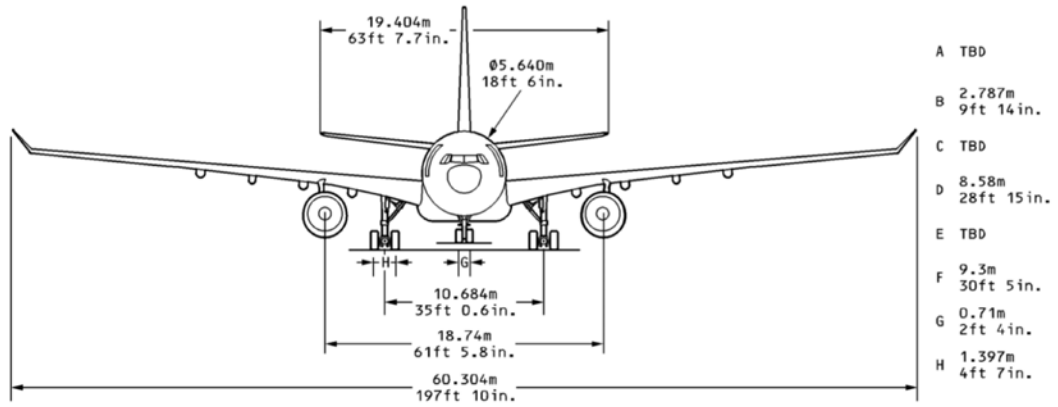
Aircraft A330-200 front-view dimensions, Airbus [3]
